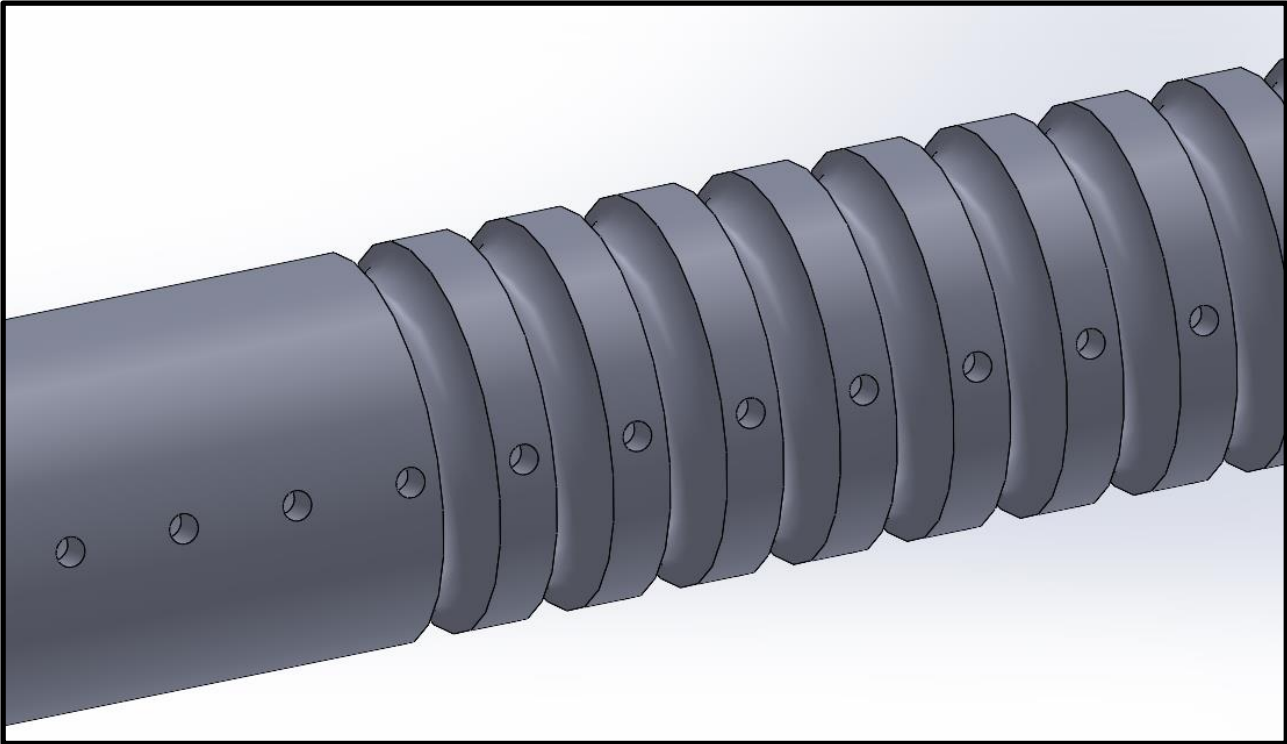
Detail of the holes and grooves on the inner axis.
